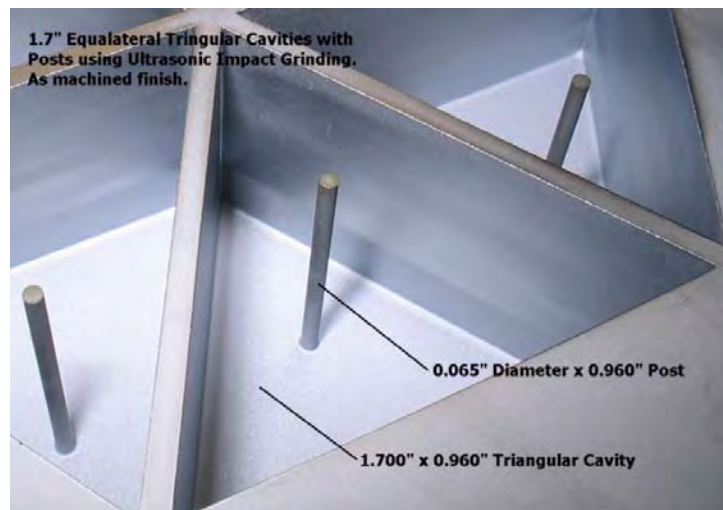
Triangular Cavity using in Ultrasonic Impact Grinding Machine (bullentech.com)
